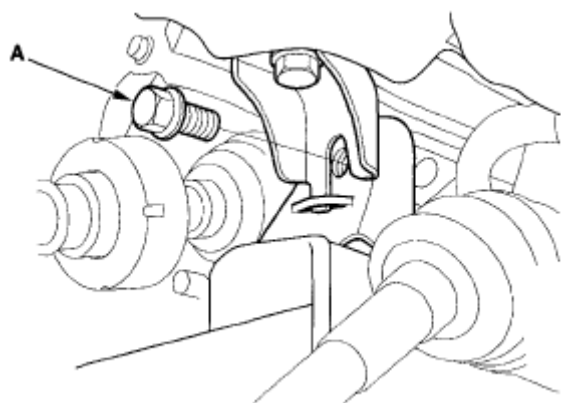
Identifying Front Subframe Middle Mount Bolt (A) From Left Side
